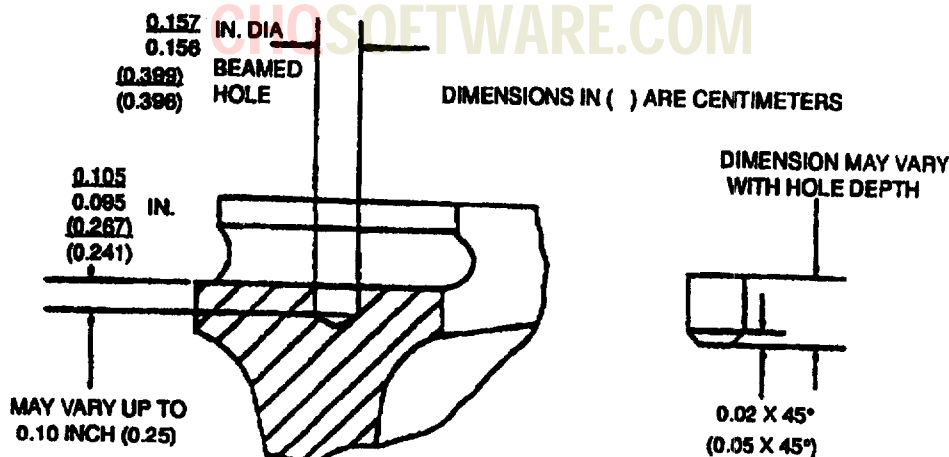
Shaft and Disk Pin Hole - Repair.
